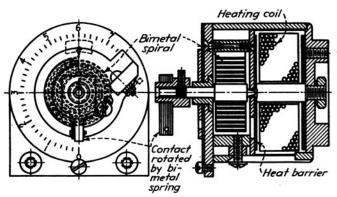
In this Westinghouse overload relay for large motors, a portion of the motor current is passed through a heating coil within the relay. Heat from the coil raises the temperature of a bimetal spiral which rotates a shaft carrying an electrical contact. To withstand the operating temperature, a heat-resistant bimetal is used, coiled into the spiral form for compactness. Because of the large deflection needed, the spiral is long and thin, whereas the width is made large to provide the required contact pressure.
